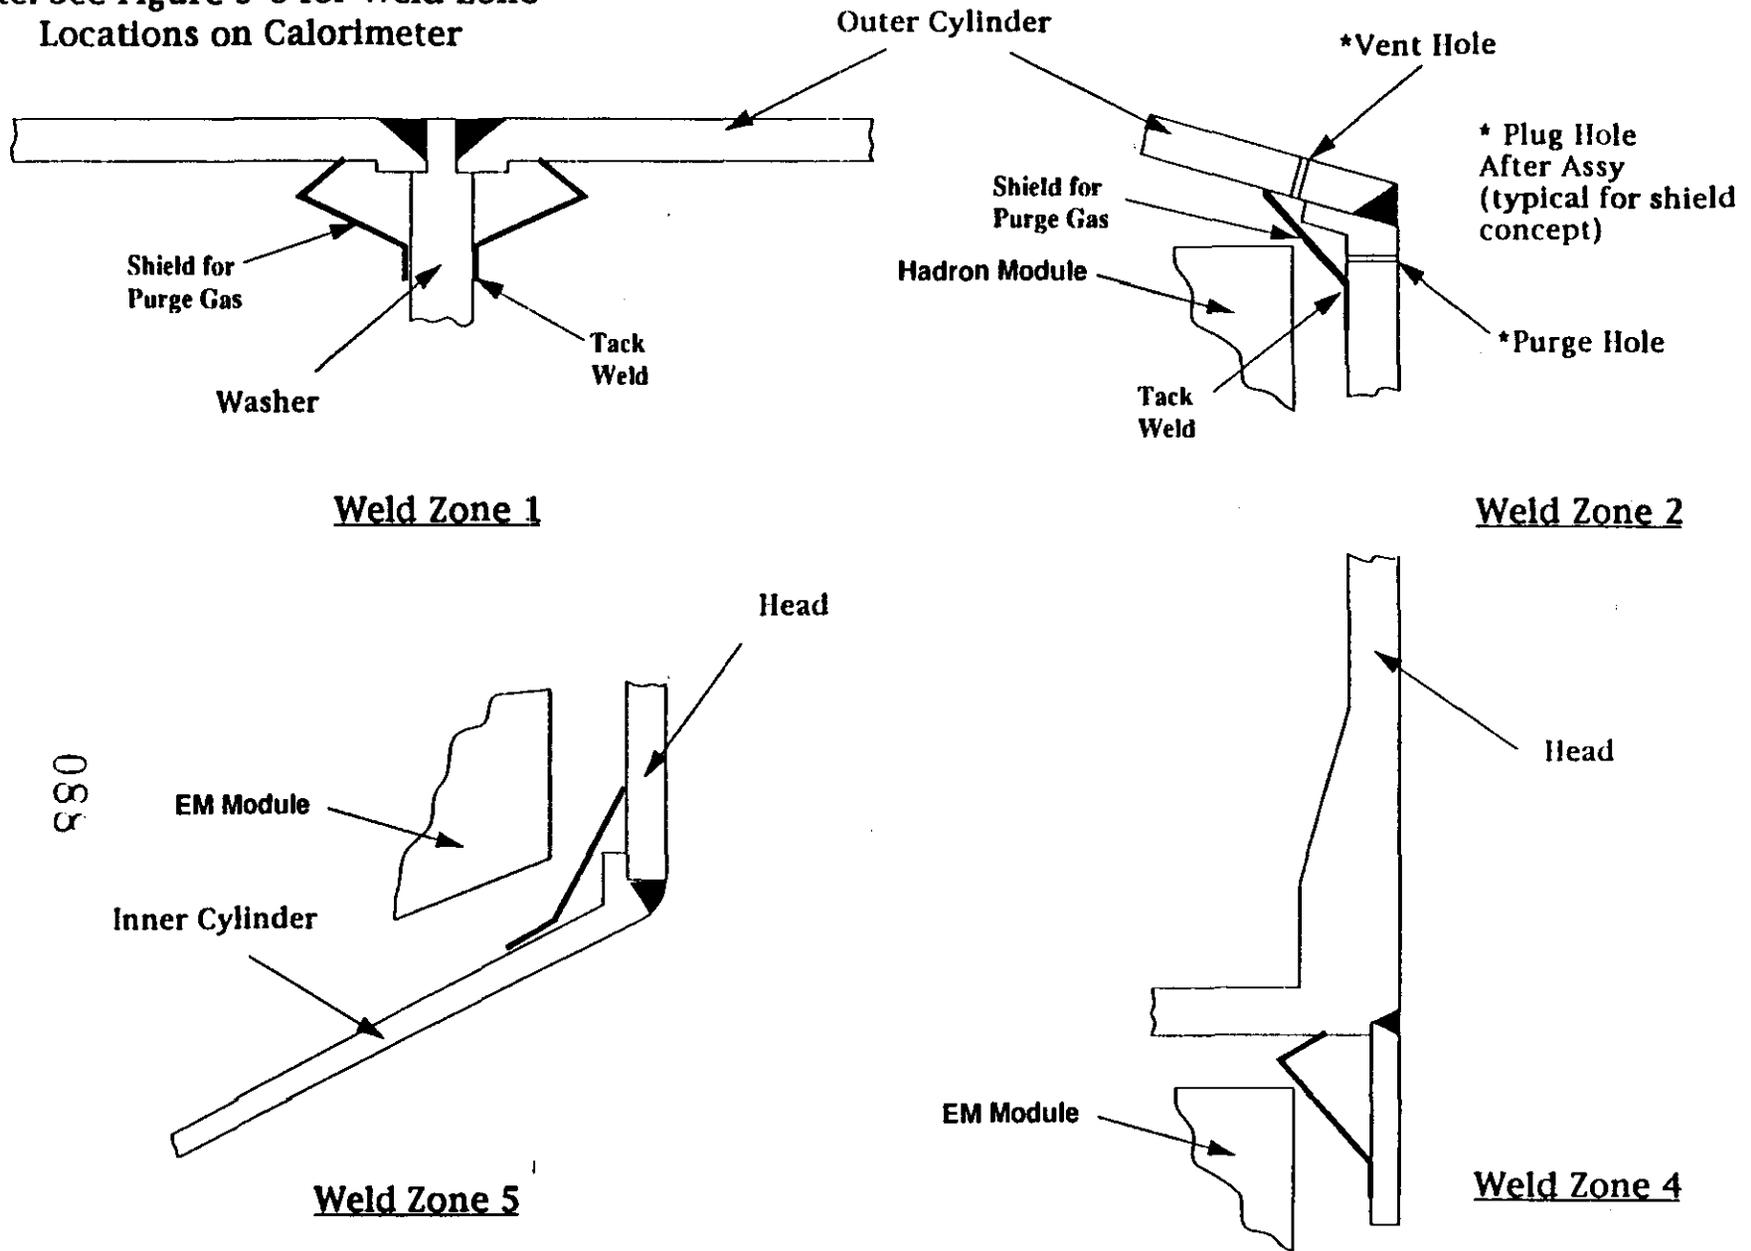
Weld Joints(Baseline) Shielded & Purged During Assembly of Barrel EM Calorimeter
